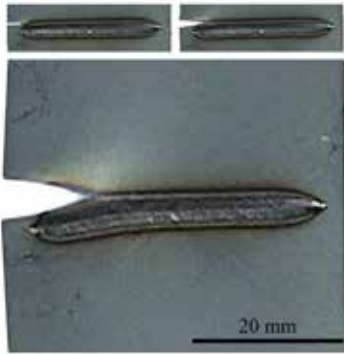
The edge crack growth at the laser welded specimen. The cracks tend to grow in the HAZ Zone.
